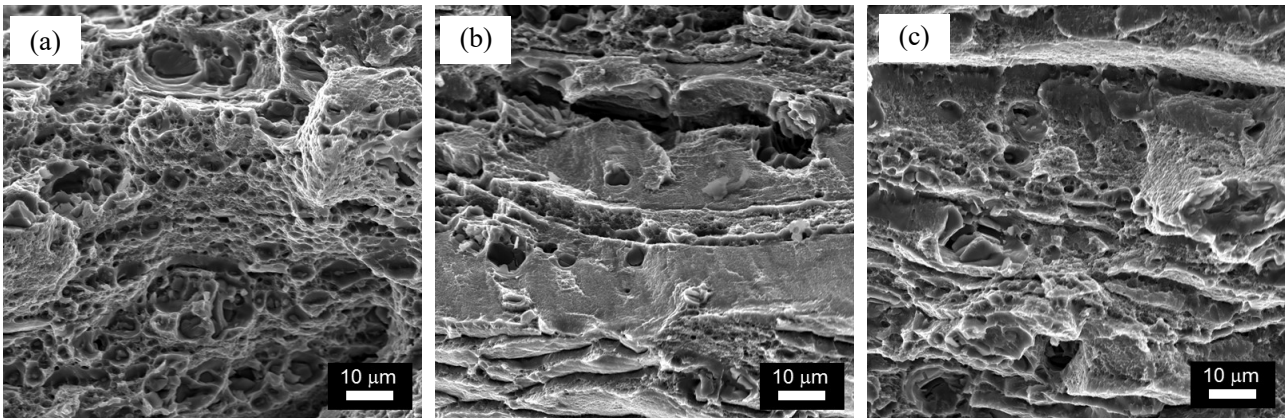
Fracture surface of (a) 693 K pressed, (b) 723 K pressed, (c) 753 K pressed A7075 alloy.
